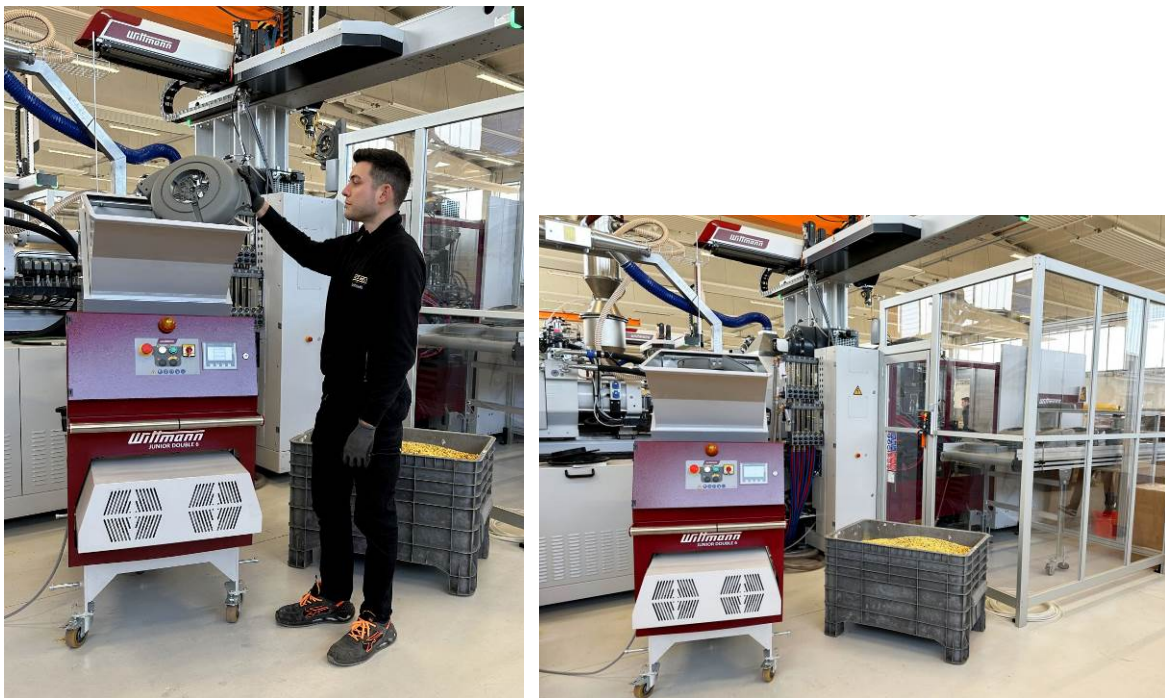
+b: Sprue and reject parts are reground directly next to the machine. For many products, the granulate can be blended in with the virgin raw material. (Photo: WITTMANN)
